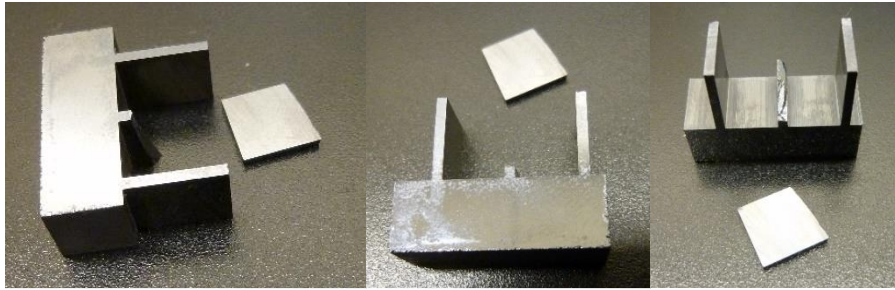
Silicon test piece cut into the approximate size of the final part. Dimensions of the blades and feed rate are critical to avoid breaking the silicon blades.
